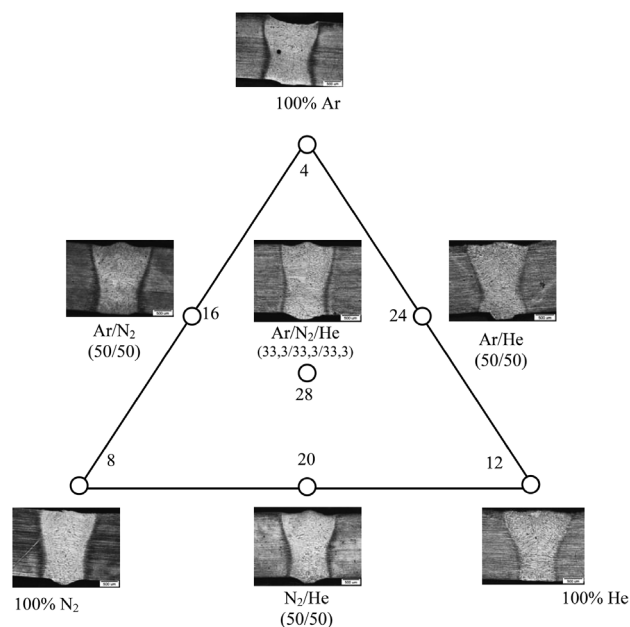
Cross-sections of welded joints for all shielding gases and mixtures at maximum welding speed and minimum flow rate of the shielding gas – experimental condition a (v_{\max} , Q_{\min})
